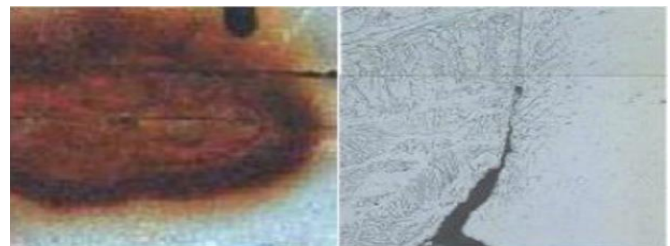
Overview of pit on corroded 304L stainless steel weld
